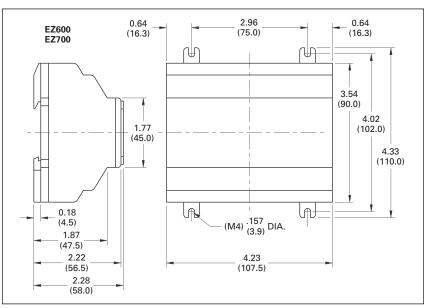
EZ600 and EZ700 Series Dimensions in Inches (mm), Drawing Number MD05013002E
